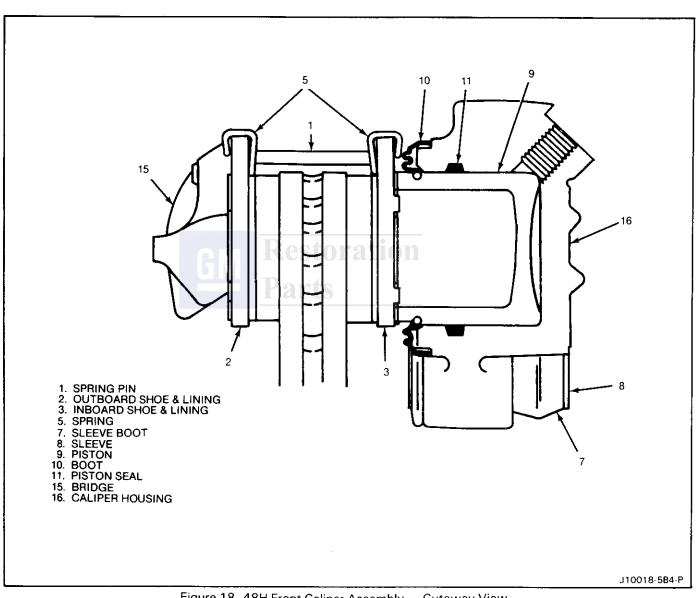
$\,$ 48H Front Caliper Assembly - Cutaway View
